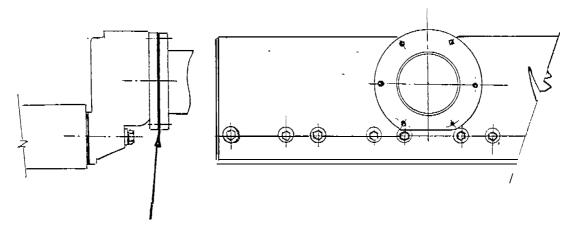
Gasket Between Exhaust Pipe and Exhaust Manifold Flange
